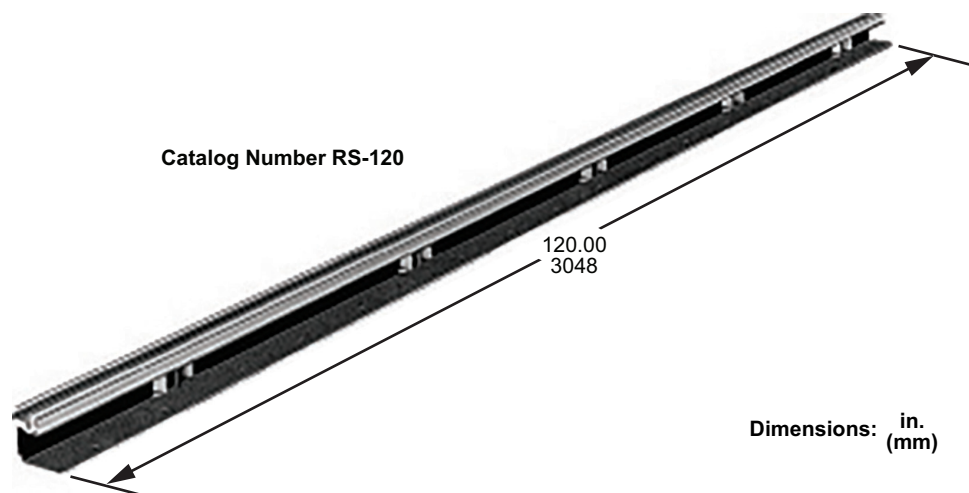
Space Bar and Partition Height Adjustment Gauge
